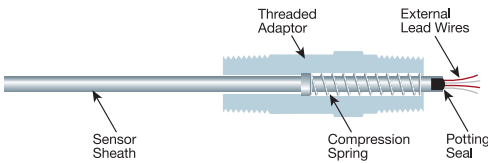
Spring Loaded Threaded Style
